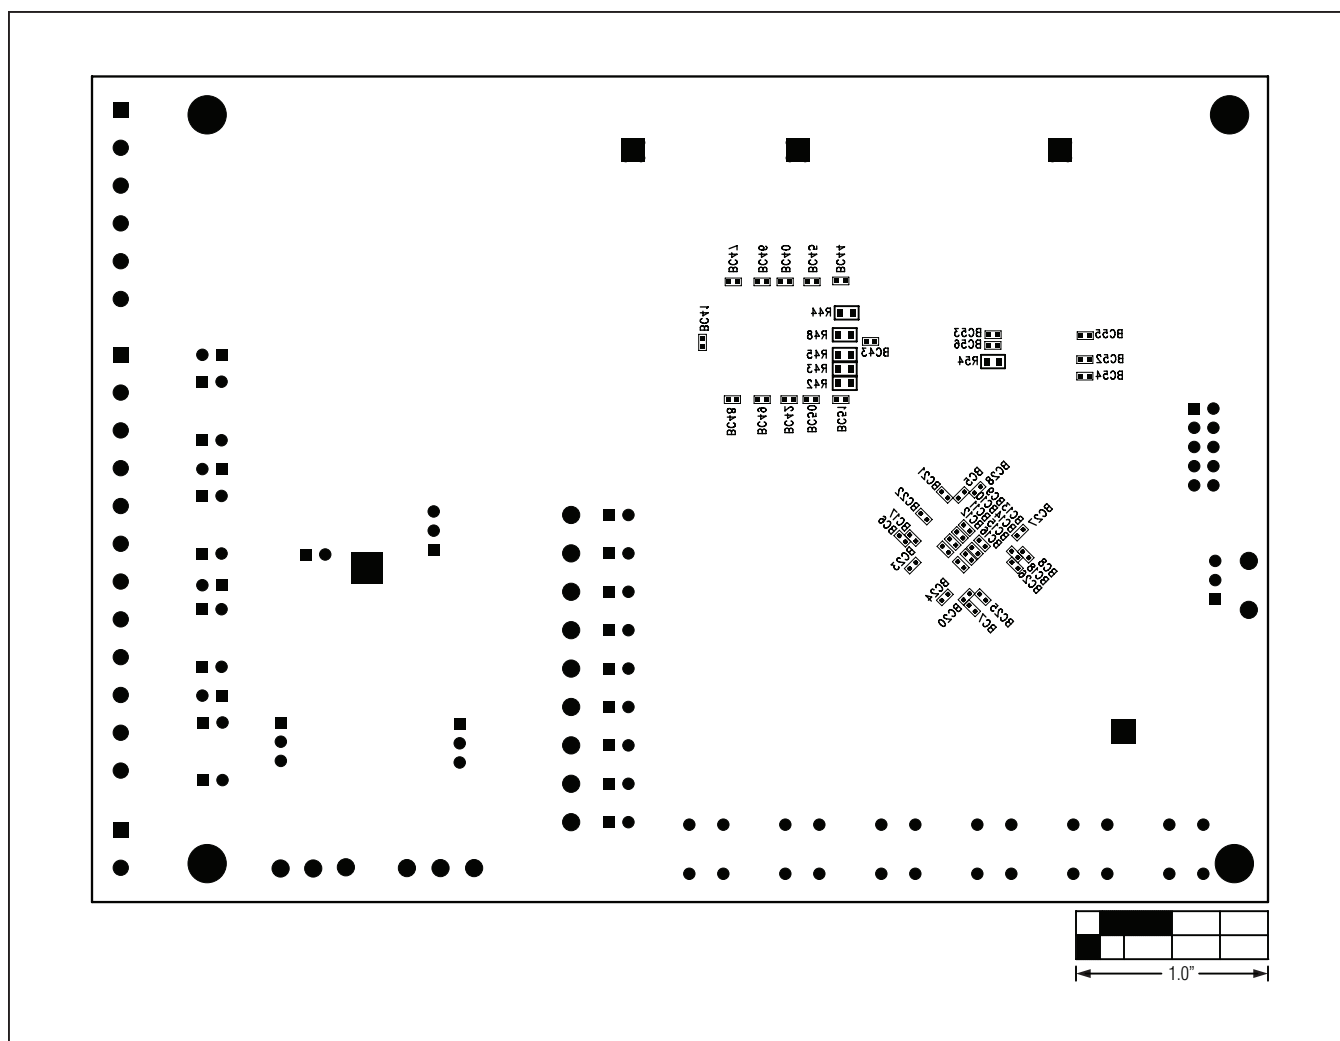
MAX11043 EV Kit Component Placement Guide—Solder Side
